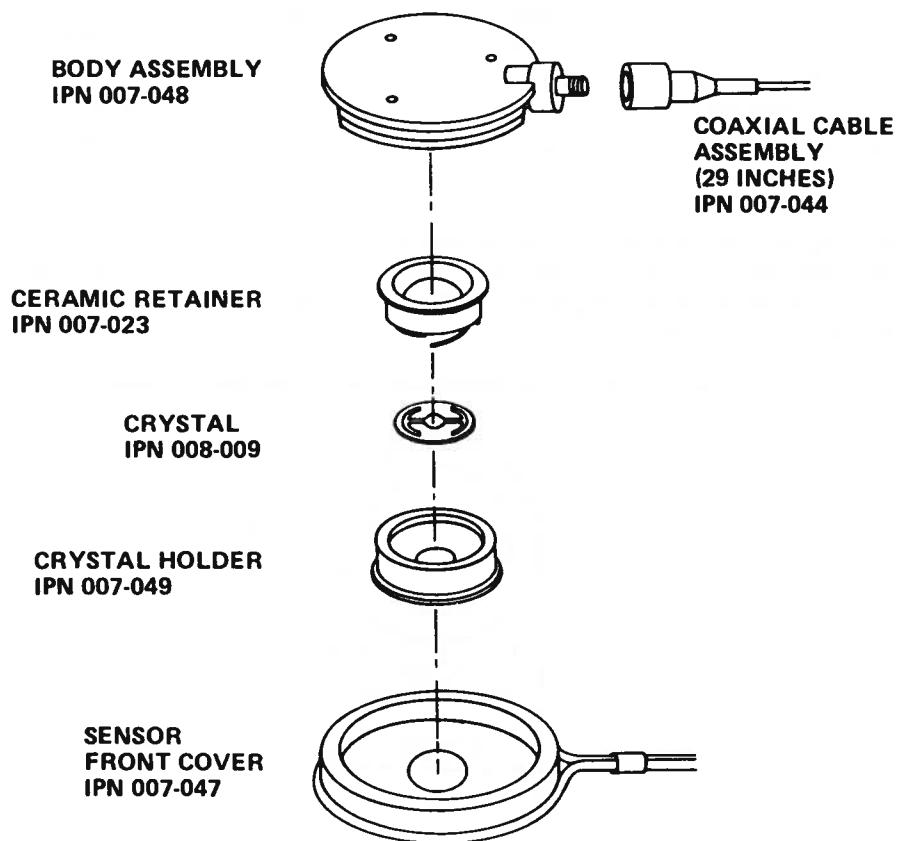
Sputtering Crystal Sensor (Exploded View)
